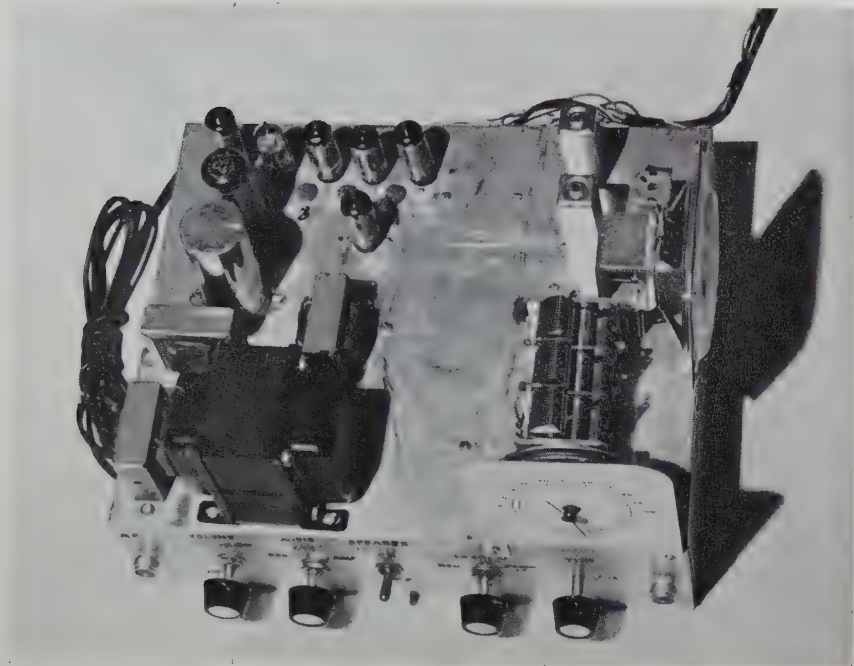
(a). Top view of receiver packaged using the component grouping method.
